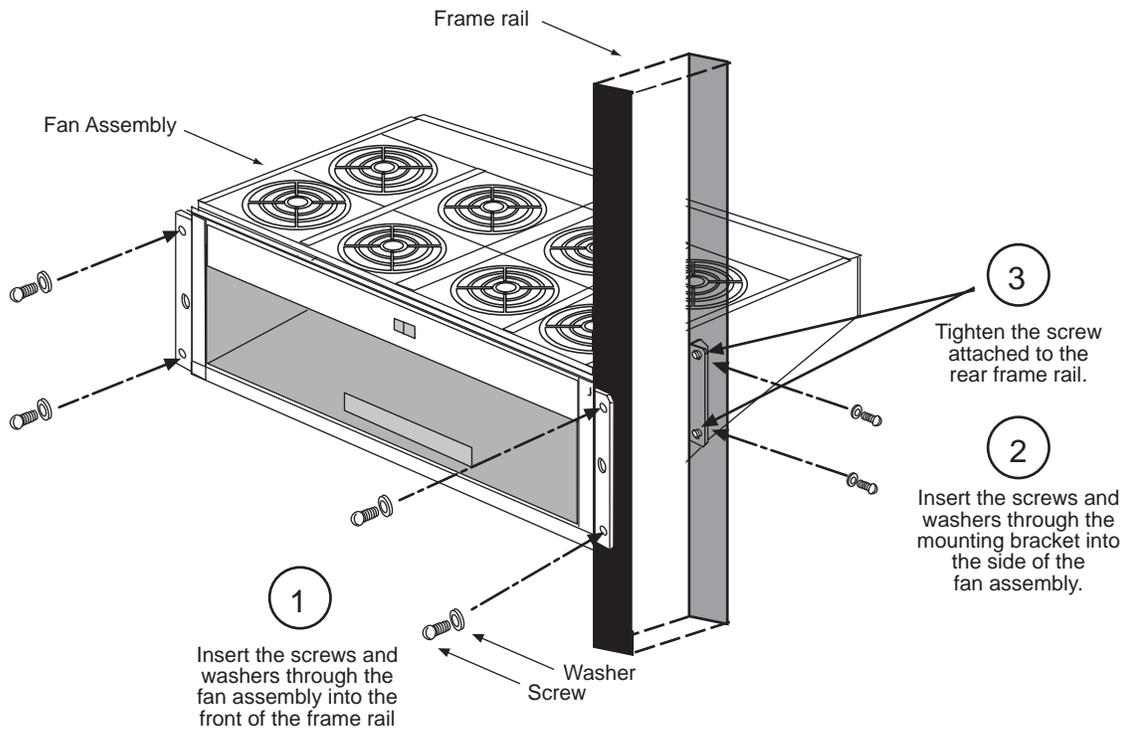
Attach Fan Assembly to Front of Frame Rail
